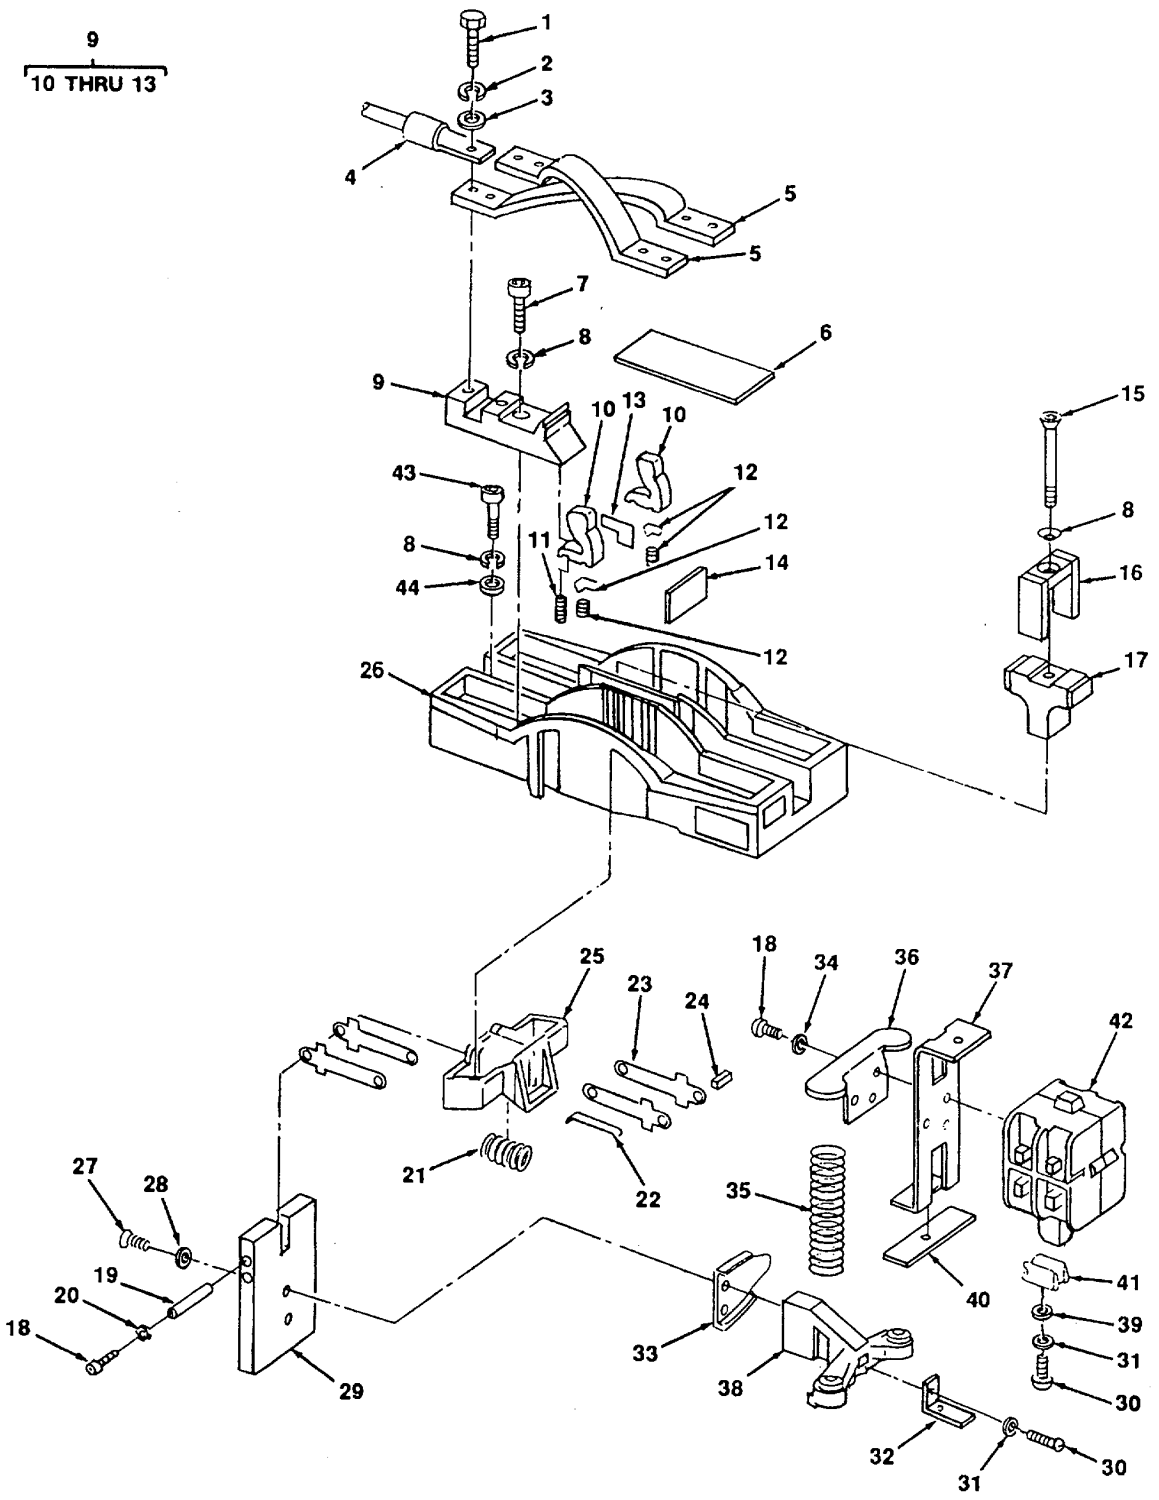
Switch, Magnetic Reverser (Sheet 1 of 2).
